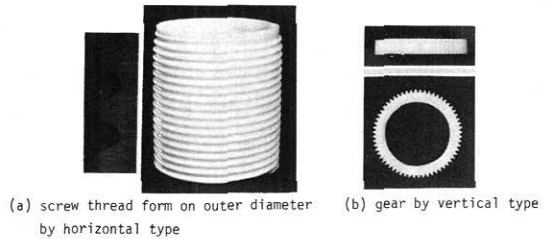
Photographs of cylindrical products with screw thread on the outer diameter and gear tooth
